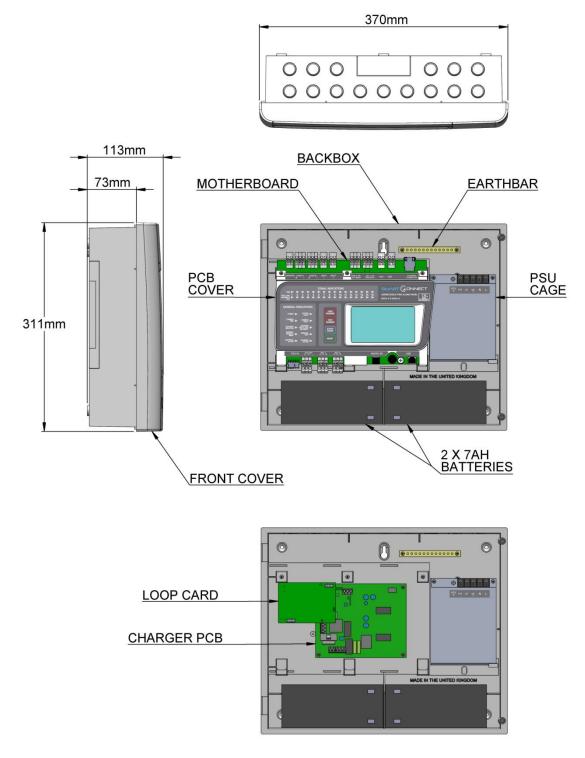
Plan view of Smart Connect panel showing internal view with main PCB fitted and with main PCB removed
